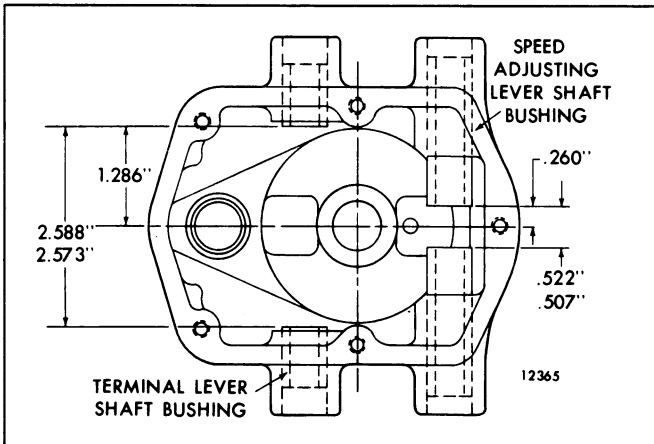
5 - Location of Speed Adjusting Lever and Terminal Lever Shaft Bushing in Governor Housing
